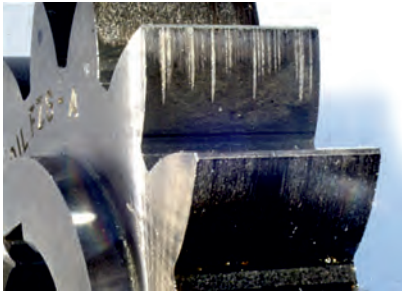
Typical scuffing marks on type A gearing (source: FZG)
